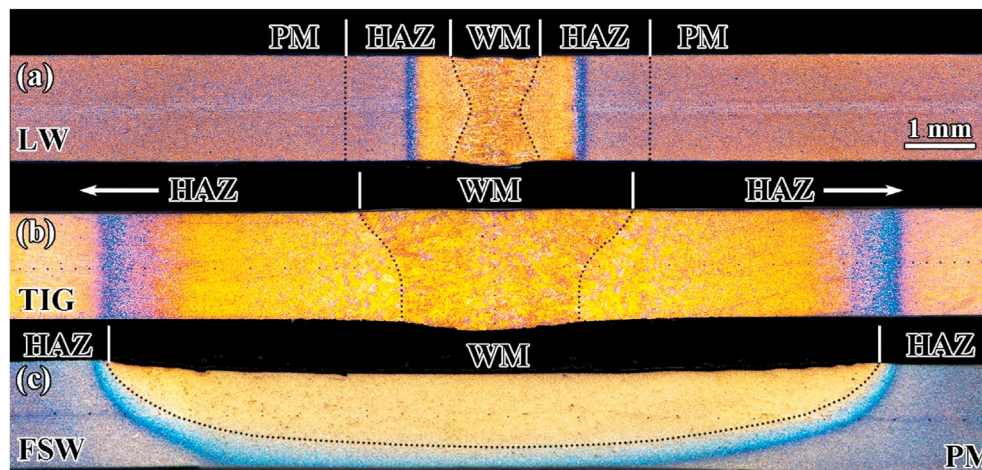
Cross-sectional macromorphologies of the Q&P 1180 steel joints after (a) LW, (b) TIG welding and (c) FSW.
